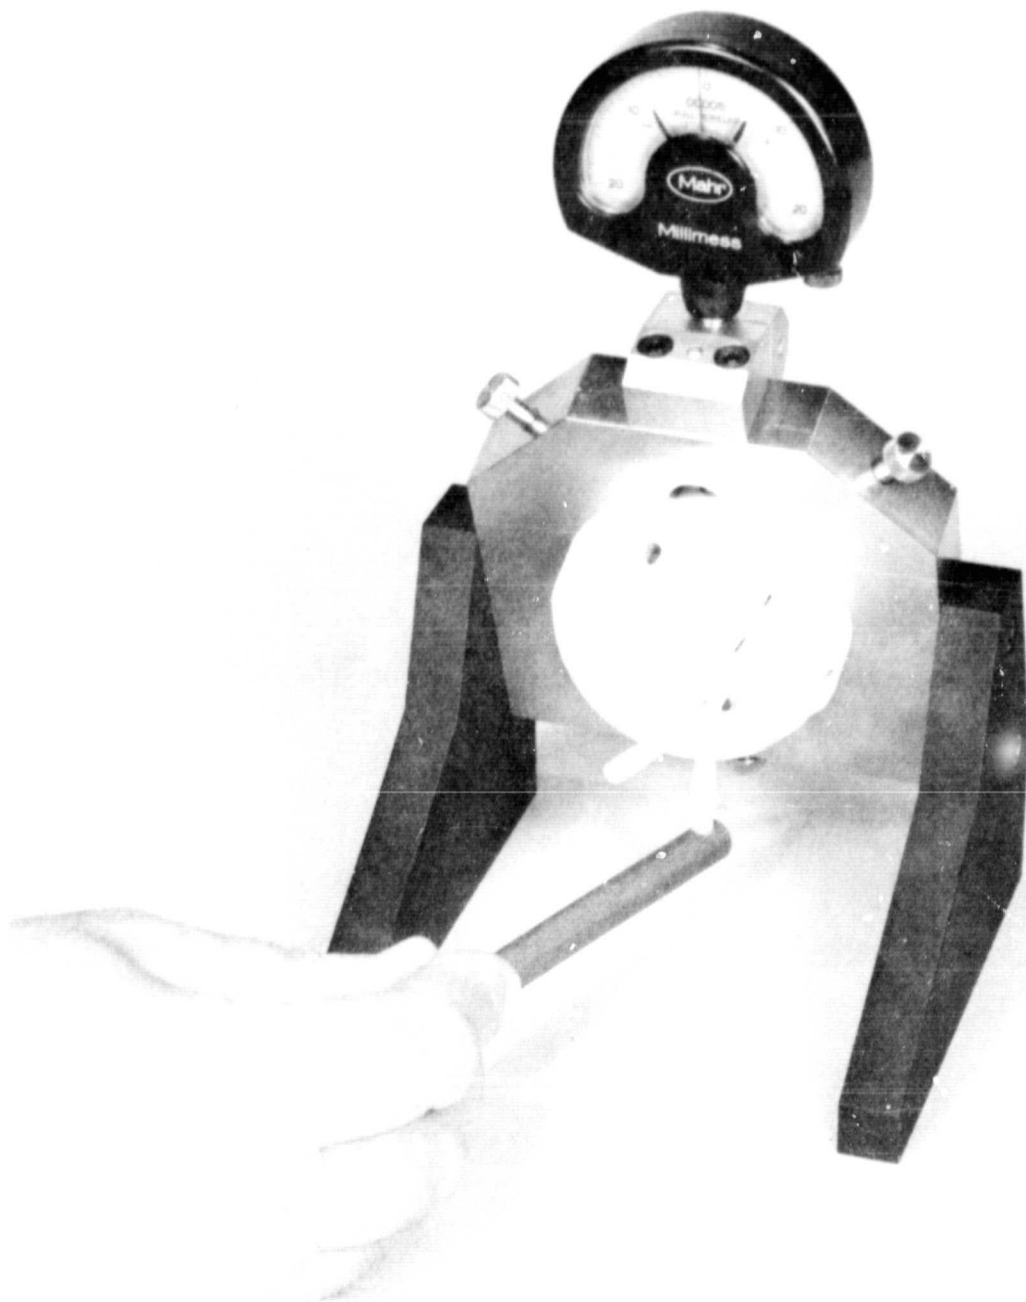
Fixture for Measuring Rotor-to- Land Clearance
